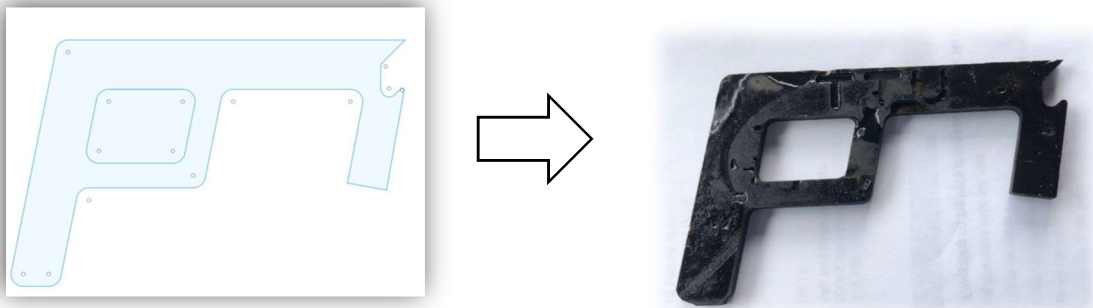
Germ Tool sample designed and machined with the software tools and CNC machines at Tennessee Tech University
